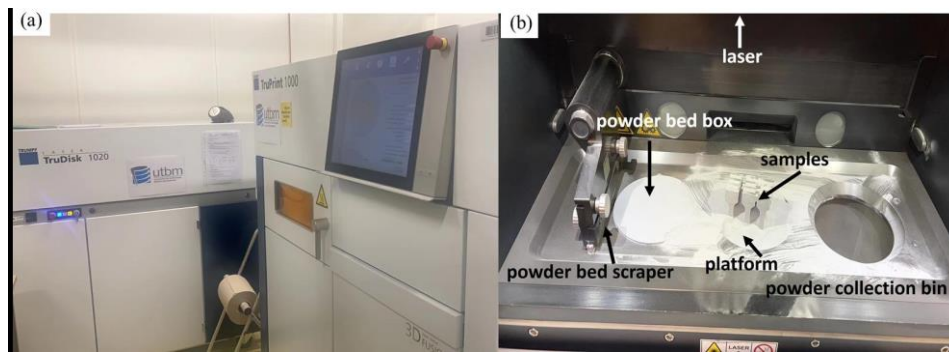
(a) The utilized SLM system, (b) working chamber
